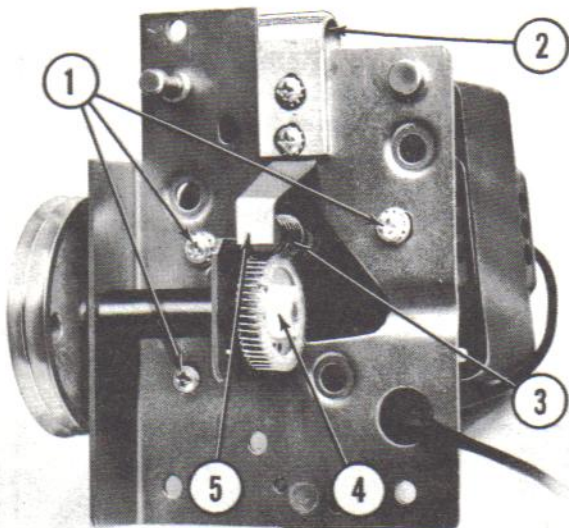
TURNTABLE GEAR DRIVE ADJUSTMENT
